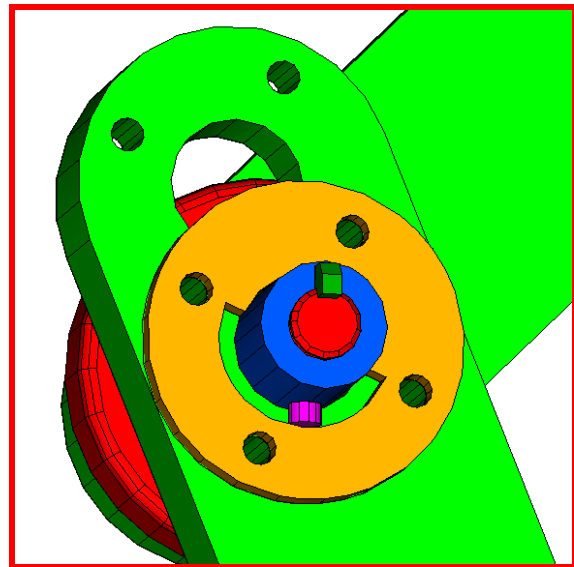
Close-up of Positioning Ring and Plate Assembly
